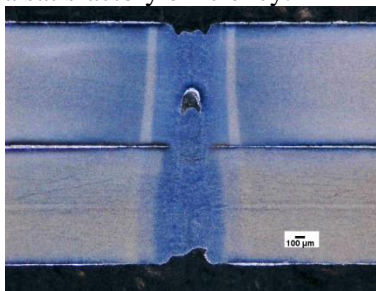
Weld bead metallography analysis; 1200 W, 2000 mm/min, DP980 face side material.
